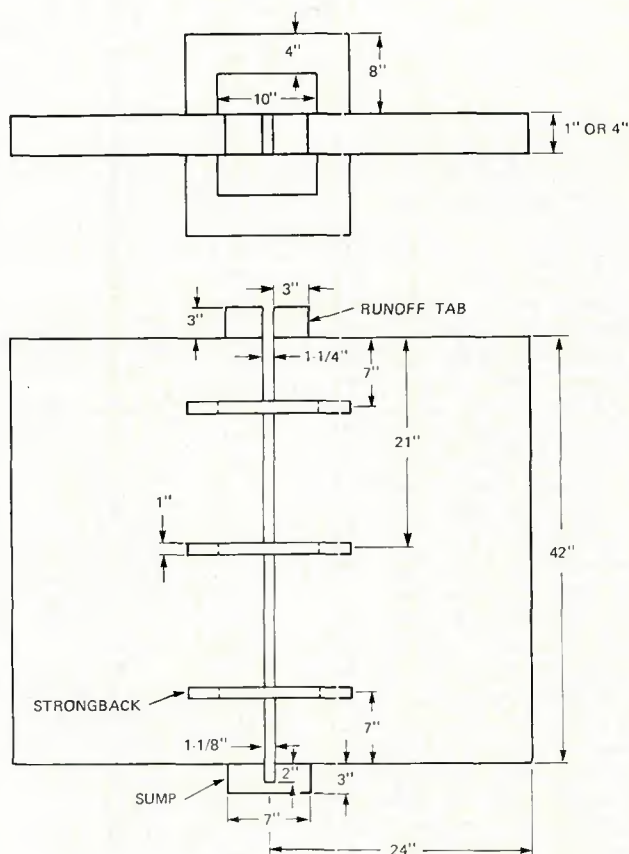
Fixturing for 42 in. (1.07 m) long weldments
